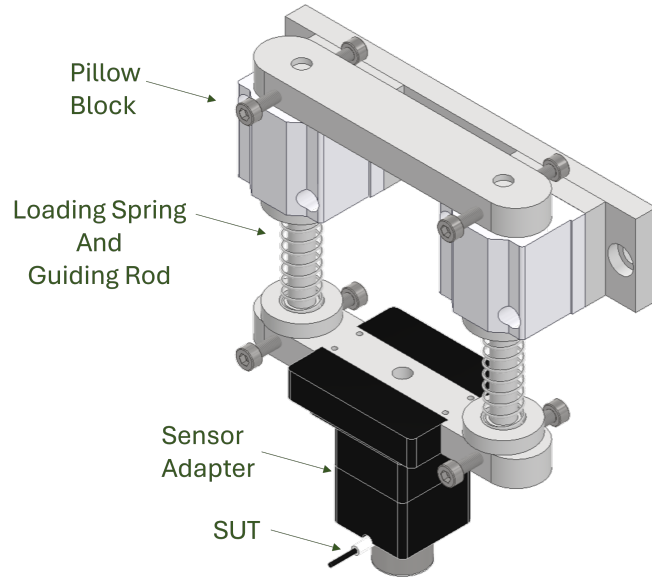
Illustration of the improved SUT coupling mechanism.
